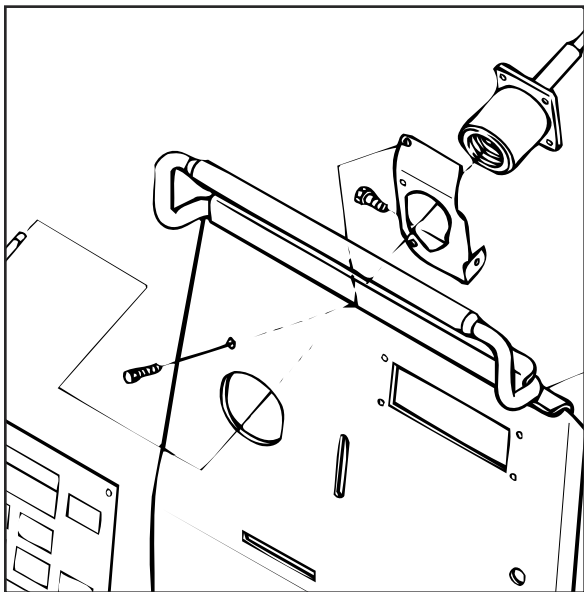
Location of Screw Holding the Gun Connector Assembly to the Case Front Panel.
